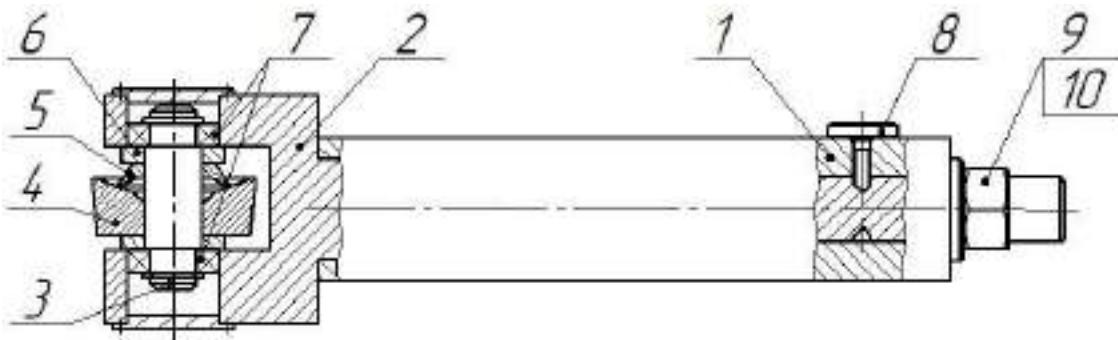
Rotary peakless rotary turning cutter with chip breaker
